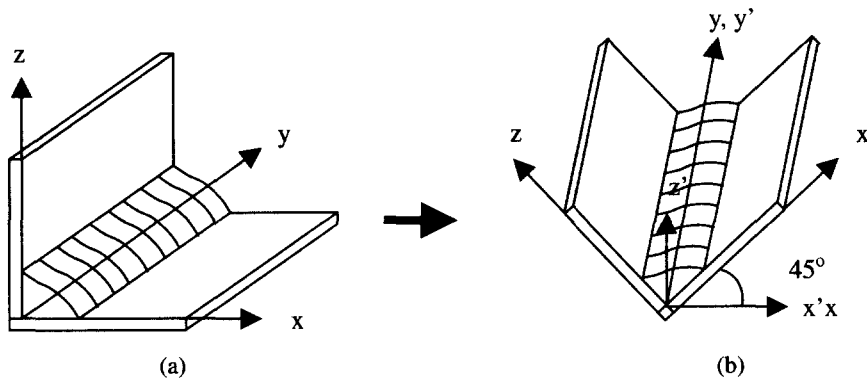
Horizontal fillet weld and coordinate systems
